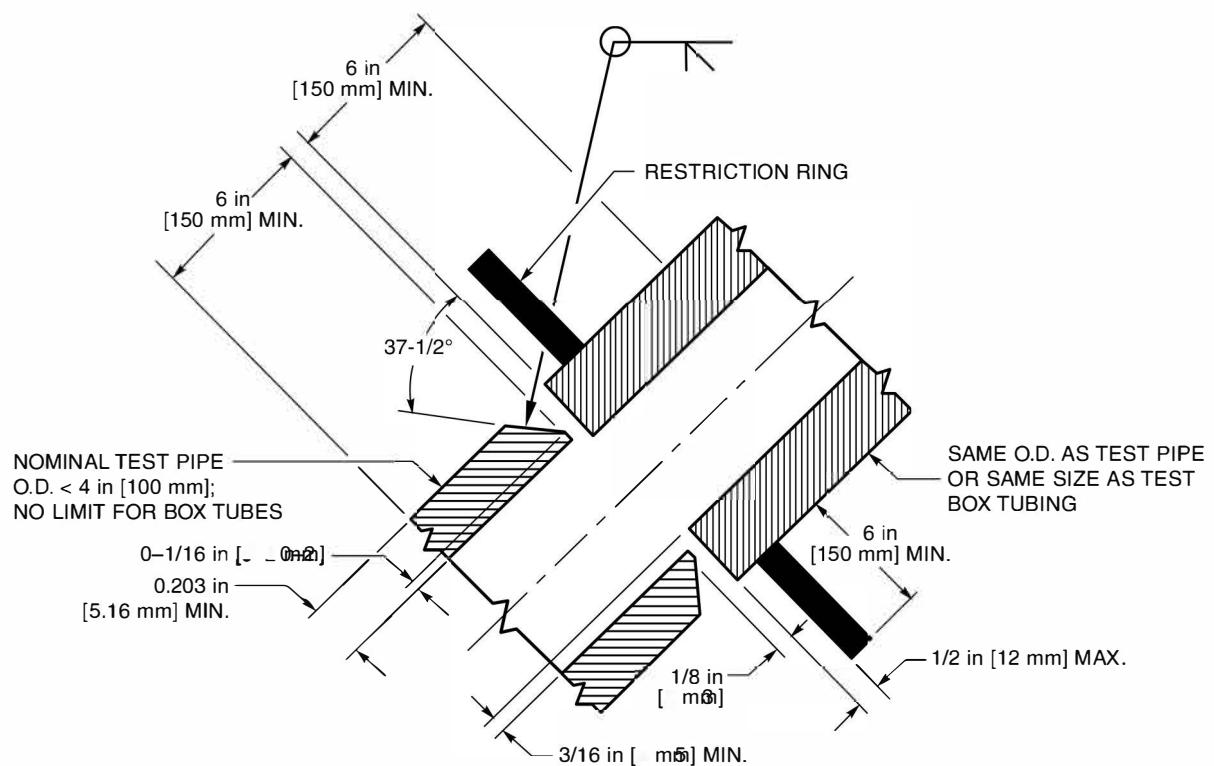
Test Joint for T-, Y-, and K-Connections without Backing on Pipe or Box Tubing (< 4 in [100 mm] O.D.)—Welder and WPS Qualification (see 10.14.4.1 and 10.18)
